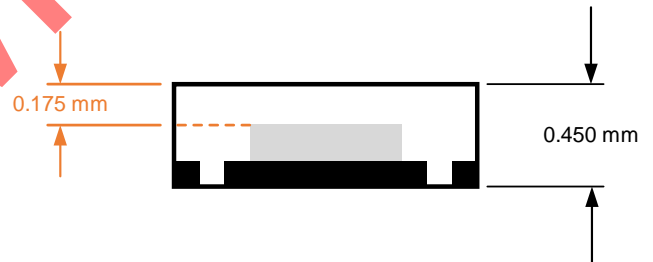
MLU Sensor Location in z Dimension for CT310 in DFN-8 Package
